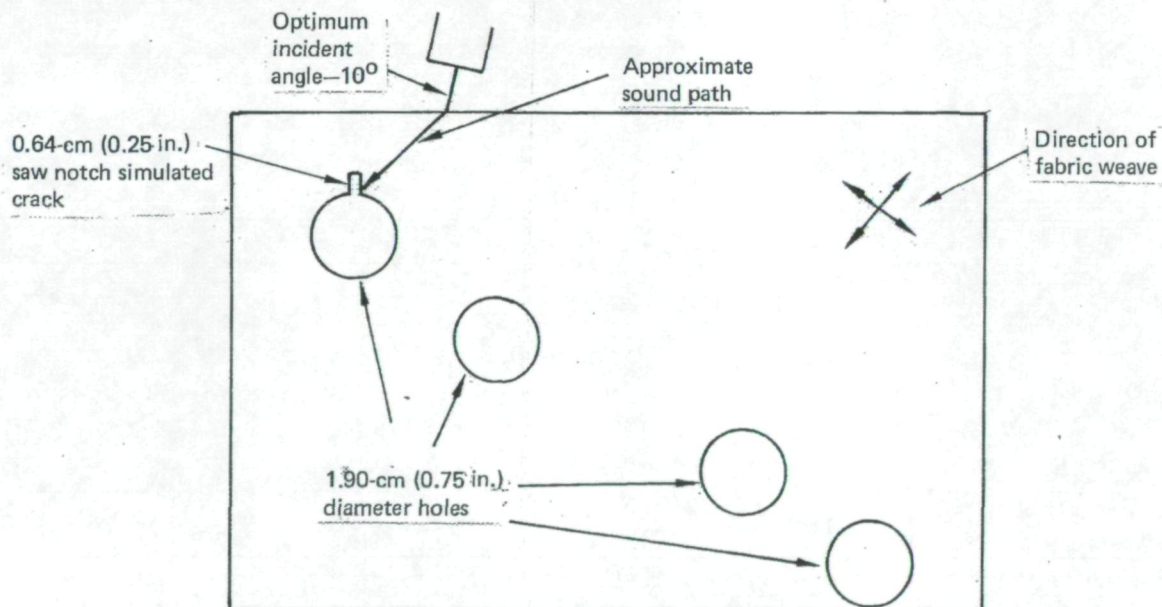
Ultrasonic Detection of Simulated Lug Hole Fracture in 3.175-cm (1.25-in.) Thick Specimen
